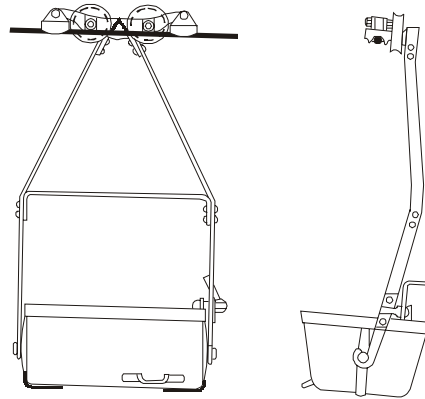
Monocable carrier with rope grip, of the rotary dump bucket type
